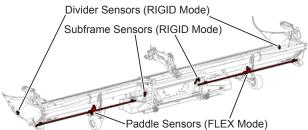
AirFLEX Header Height Control Sensor Locations
